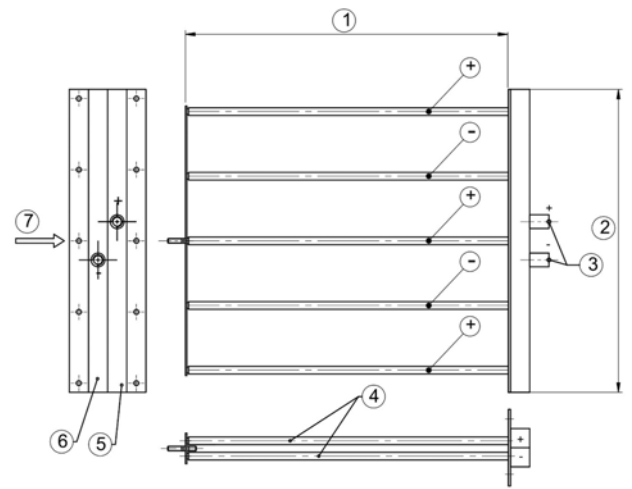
Dimensional drawing of rectangular version (front/side view)
